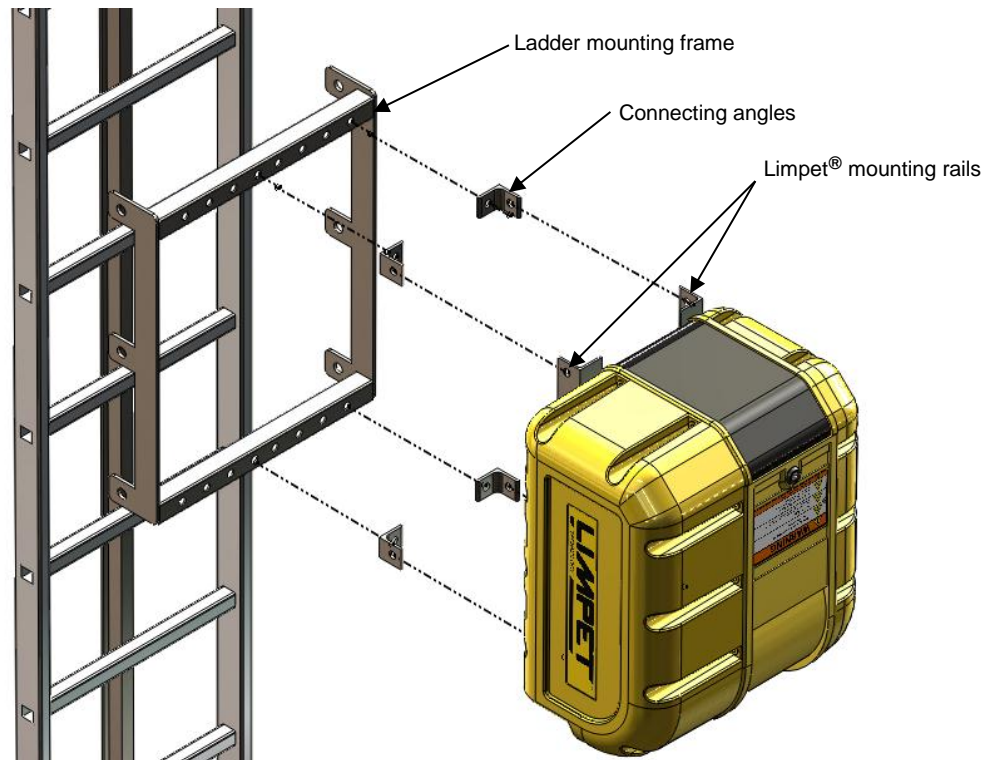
Exploded assembly showing the ladder-mounted Limpet®
